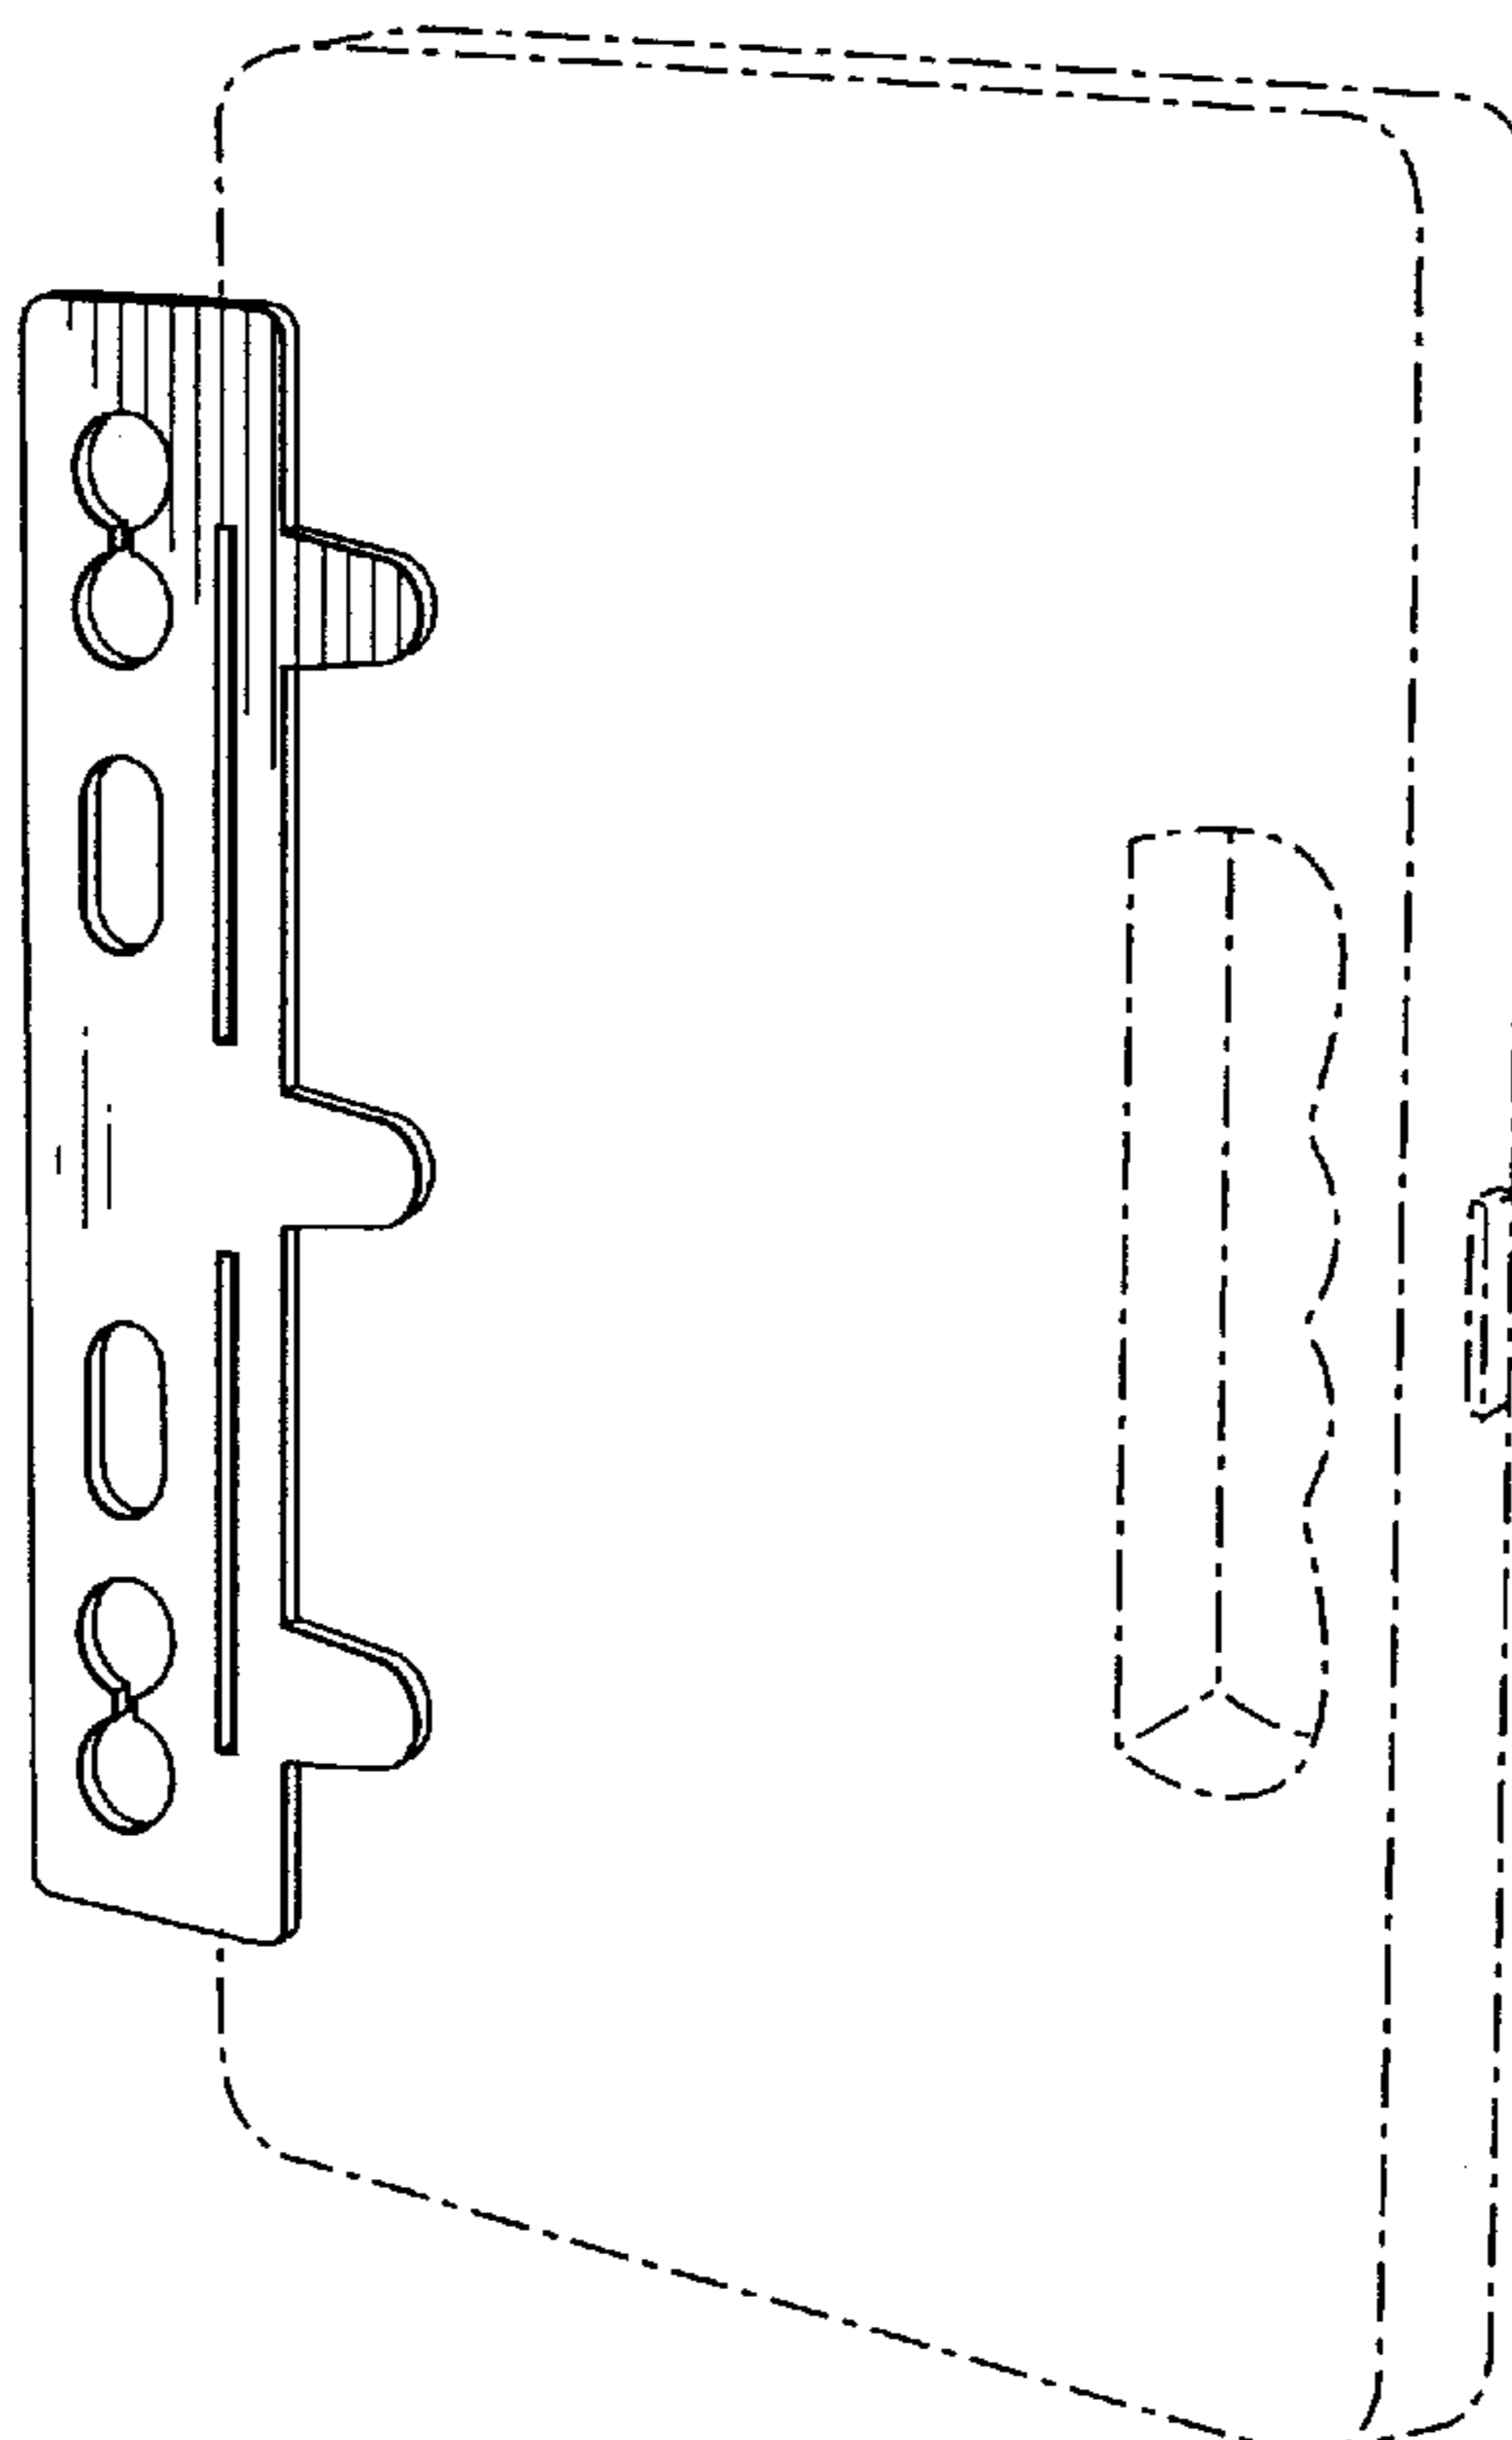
is a front elevational view of the ring binder insertion carrier of FIG. 1;
